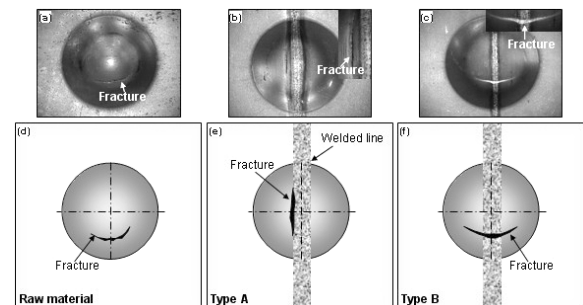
Appearance of specimen after Erichsen test and classification by fracture type: (a)Base metal, (b)1.5m/min, (c)3.6m/min (d),(e),(f)Schematic of fracture type
